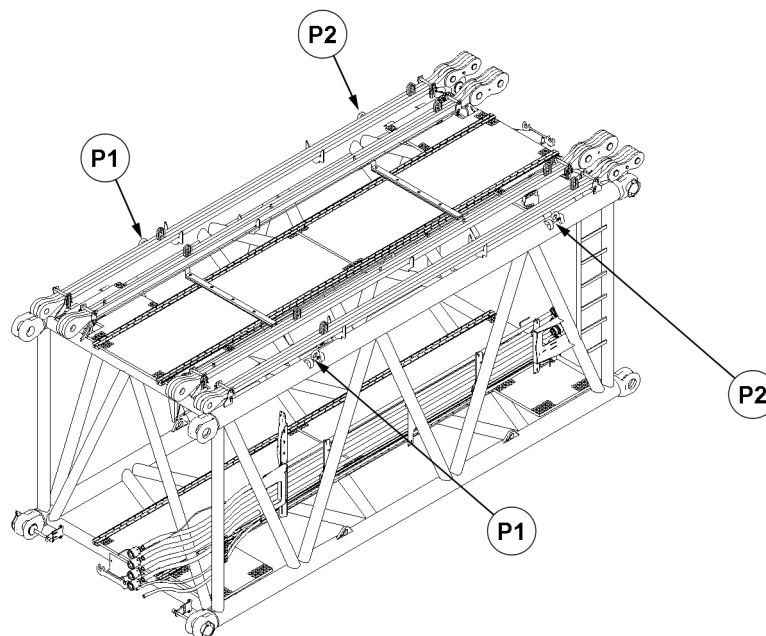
D-intermediate section 2524.20 6 m fastening points
